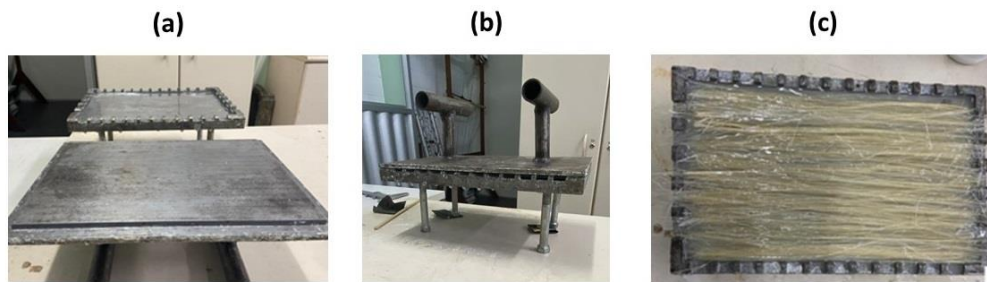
(a) Mold open, (b) mold closed, (c) fibers and resin in the mold.
